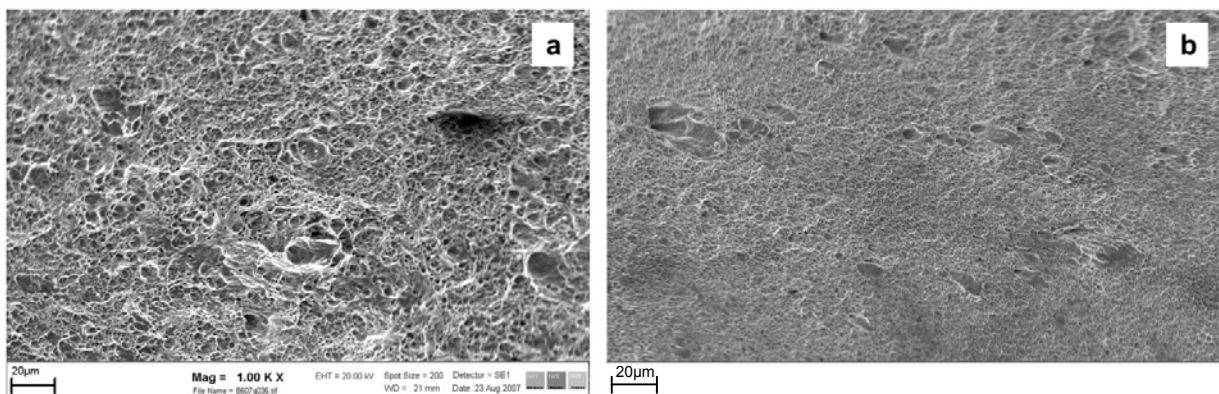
Fracture surface of friction stir welded 15-5PH steel samples a condition A; b condition H
